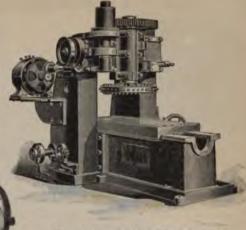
SHOWS MOTOR DRIVEN MACHINE.
